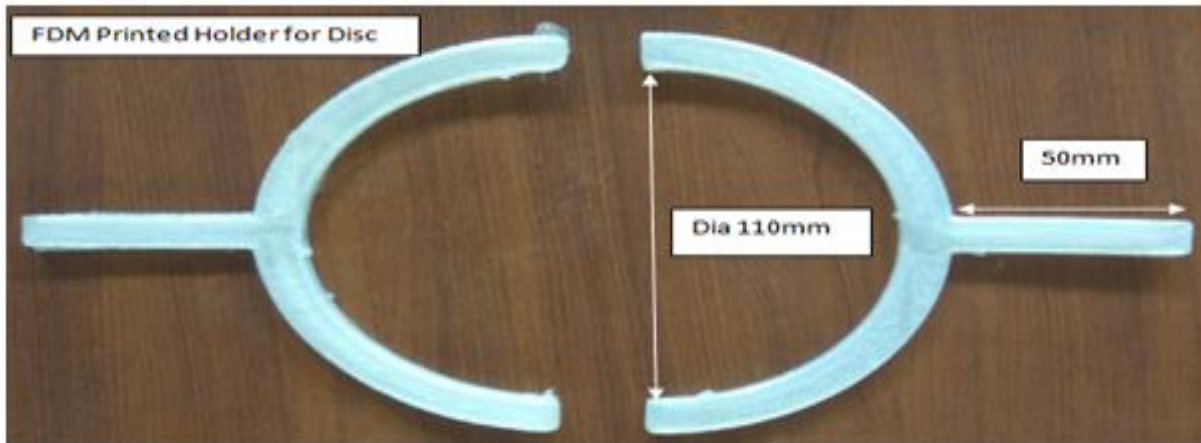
3D printed fixture for holding of the disc while circular compression testing on UTM
